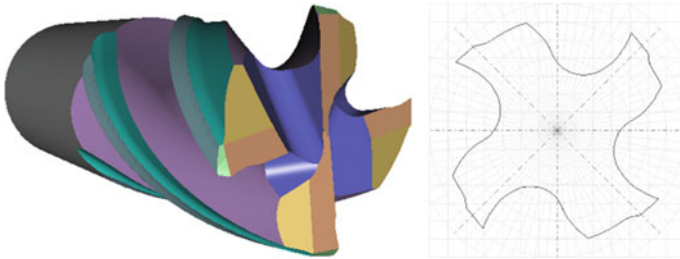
3D model and geometrical section of the definitive tool, after final optimization
